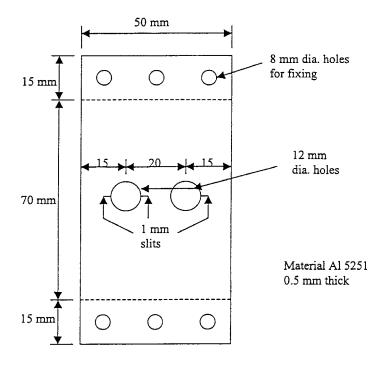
Detail CrackFirst Fatigue Monitoring Gauge Plate
